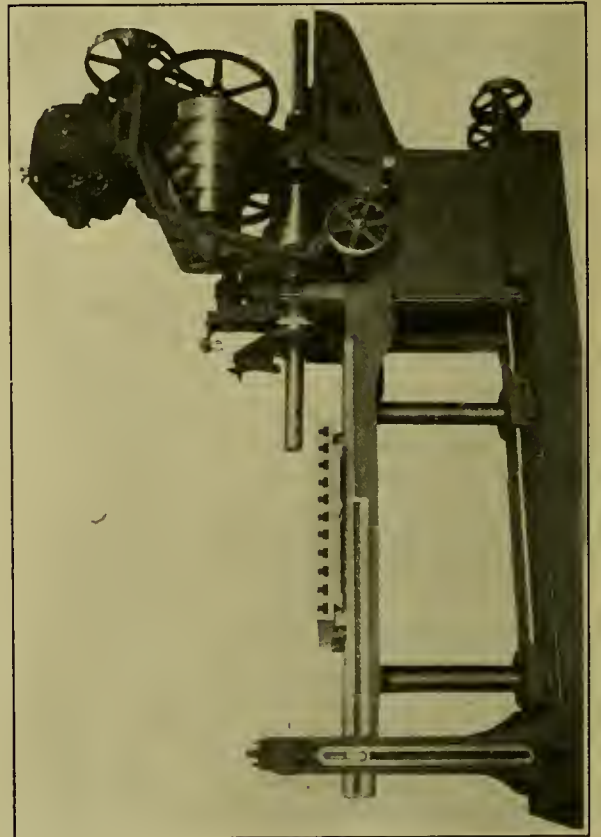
BELTED VARIABLE-SPEED MOTOR DRIVE UPON A HORIZONTAL BORING MACHINE.—BETTS MACHINE COMPANY.
